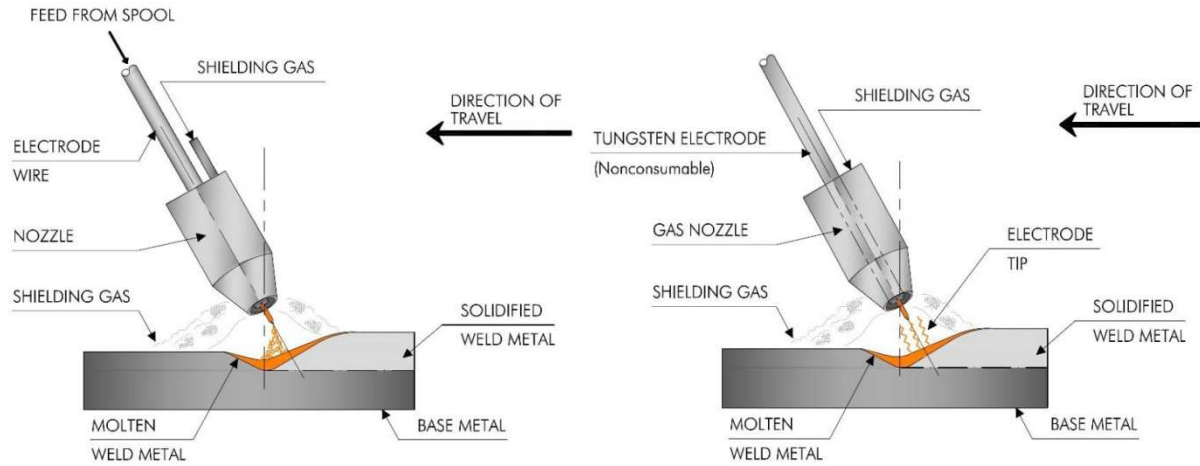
Illustration of arc welding processes: GMAW (left) and TIG welding (right) [1].
